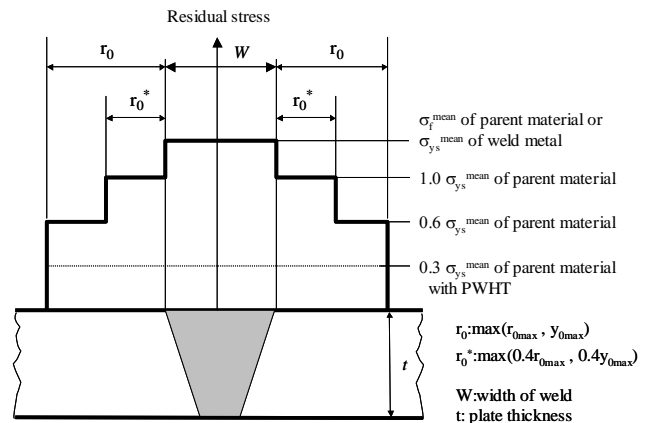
Longitudinal weld residual stress profile on the surface in the case of plate butt welds and pipe seam welds (HPIS Z101 Level 1)
